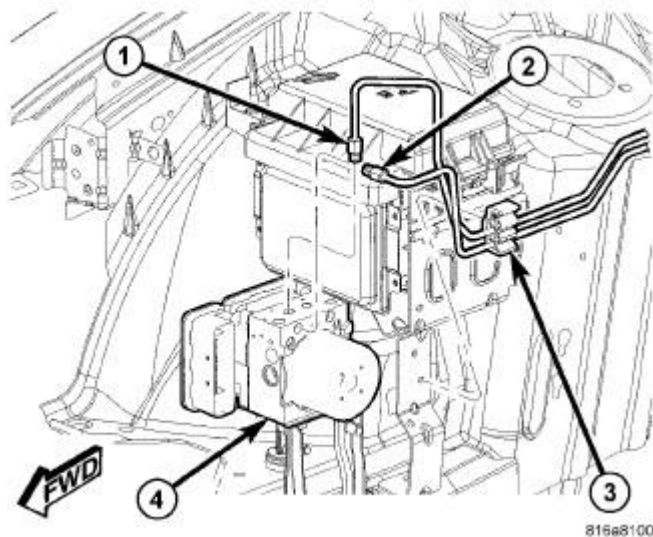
Left Rear And Right Rear Brake Tubes At ICU
